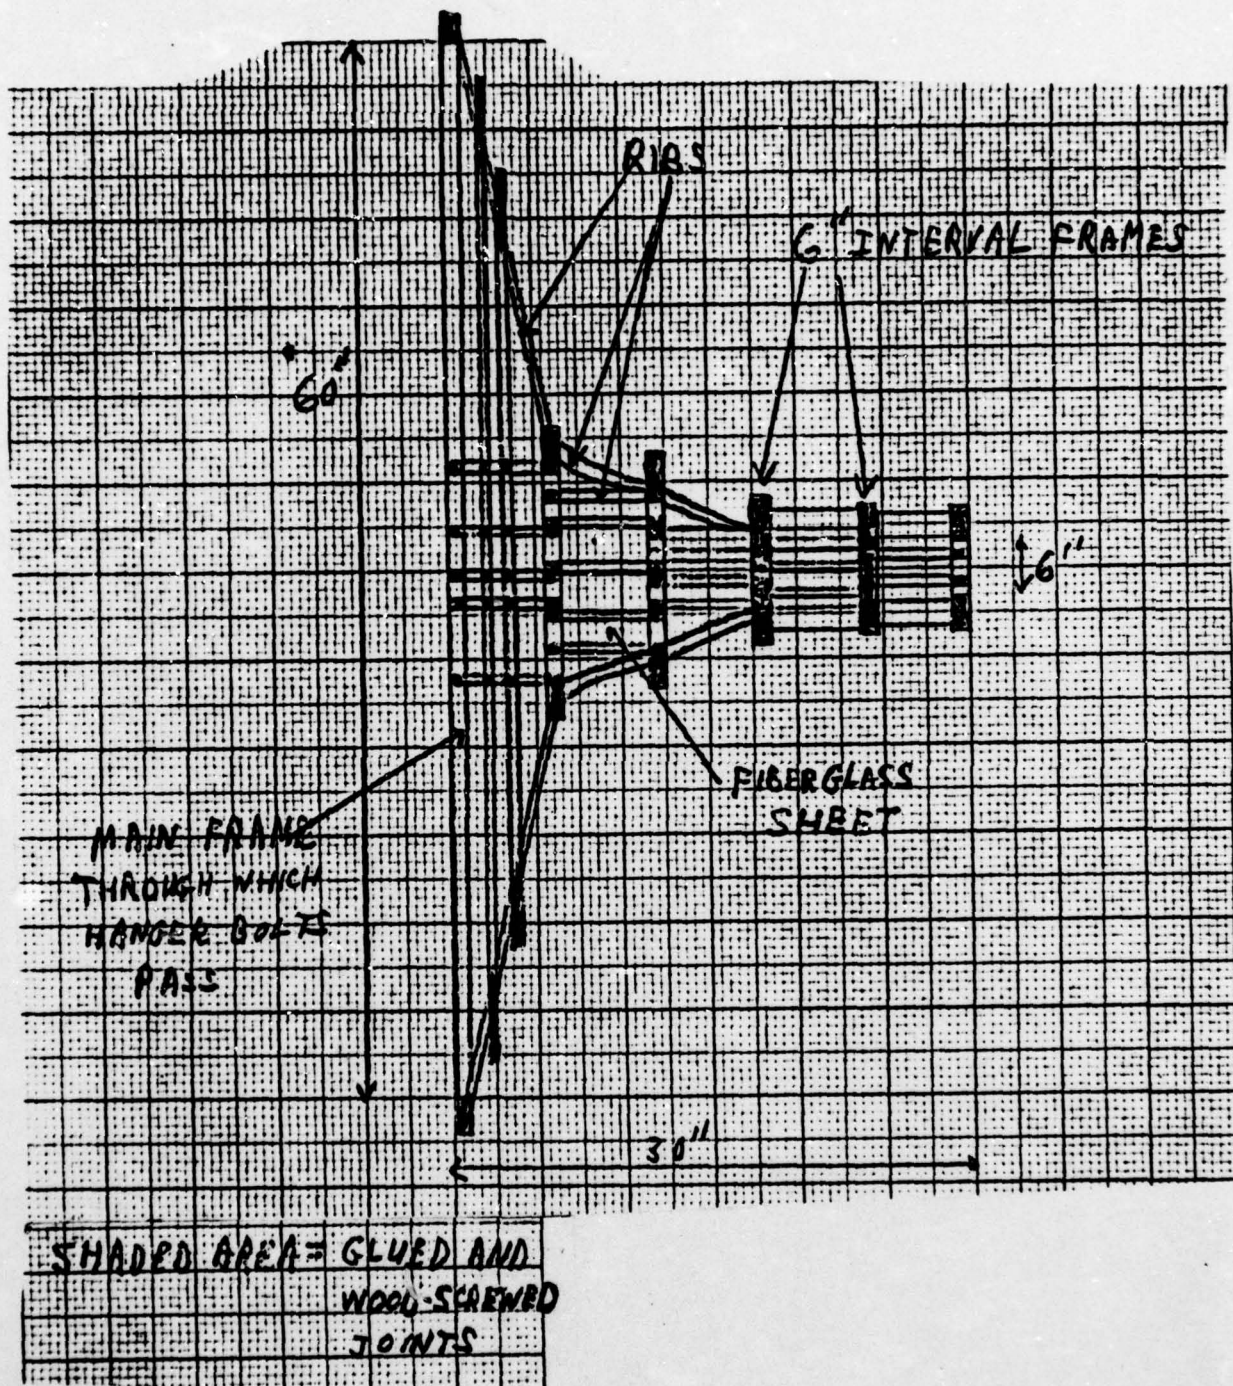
WIND TUNNEL CONTRACTION: SIDE VIEW
